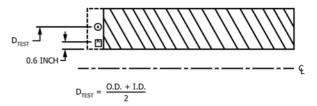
Outside Diameter and Inside Diameter as Required by Drawing
